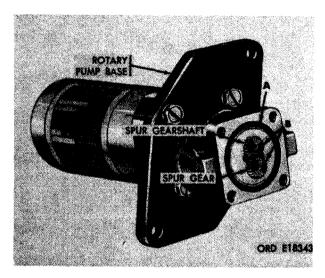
REMOVING OR INSTALLING SPUR GEAR AND SPUR GEARSHAFT.
